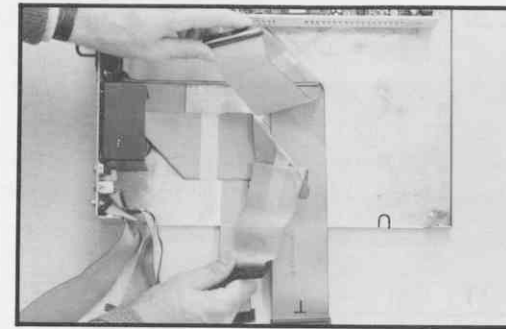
Disk Command and Tape Cables (1/4" Tape System)
